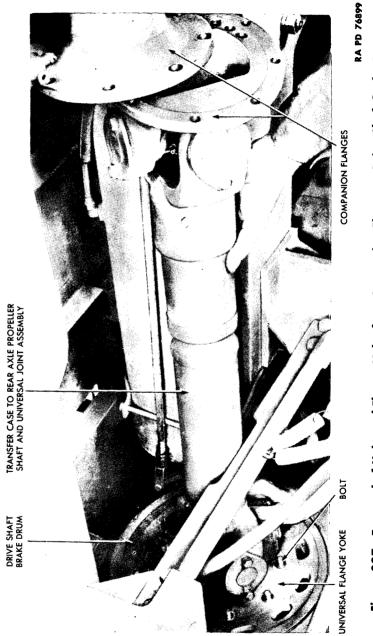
Removal of Universal Flange Yoke from Companion Flange at Drive Shaft Brake Drum
